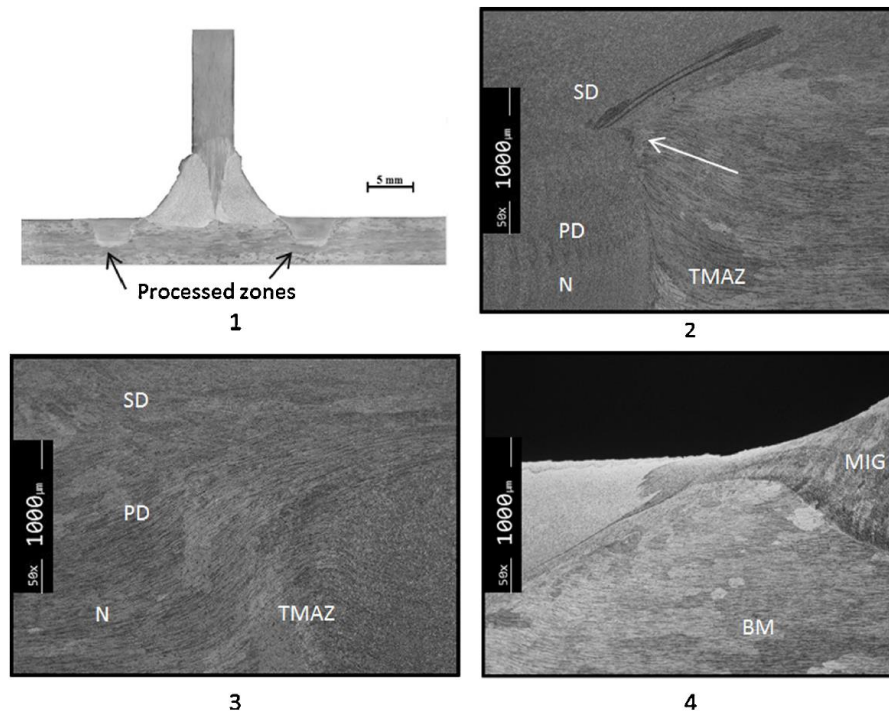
MIG weld made on AA 6082-T651 and processed with tool B: (1) macrograph; (2) advancing side of stir zone; (3) retreating side of stir zone; (4) toe region. N, nugget; TMAZ, thermomechanically affected zone; PD, pin driven flow; SD, shoulder driven flow.
